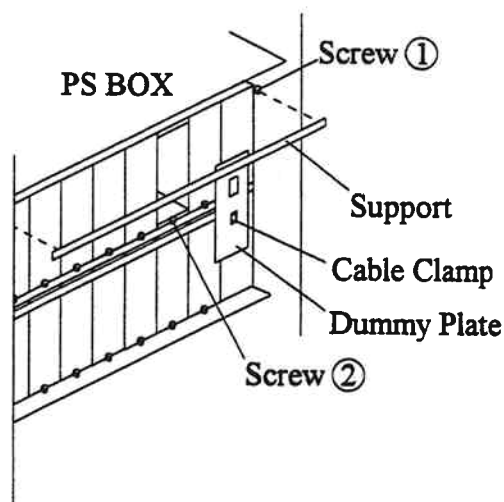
Attachment of Dummy Plate.
